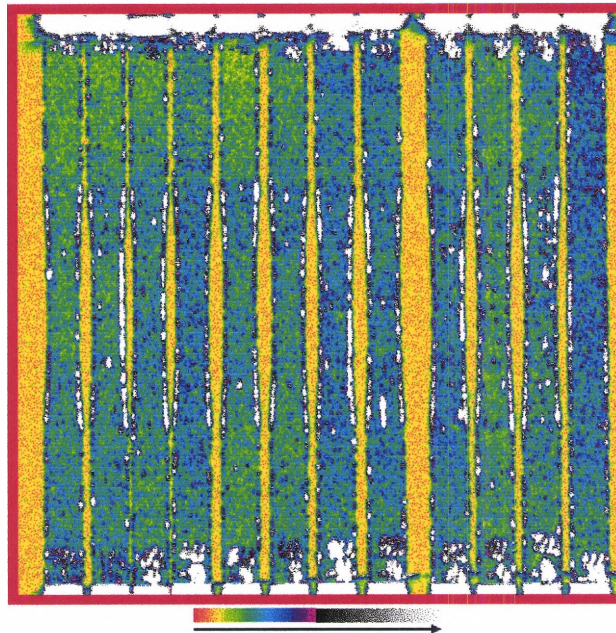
Frontside of specimens C-scanned using surface wave technique. Specimens in sequential order from left to right. Straight-sided specimen placed at right end.
